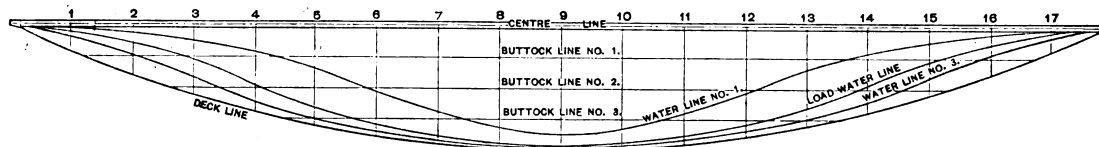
Lines for an 18-Foot Clinker Boat.—Half Breadth Plan.—Scale,  $\frac{3}{4}$  Inch to the Foot.
